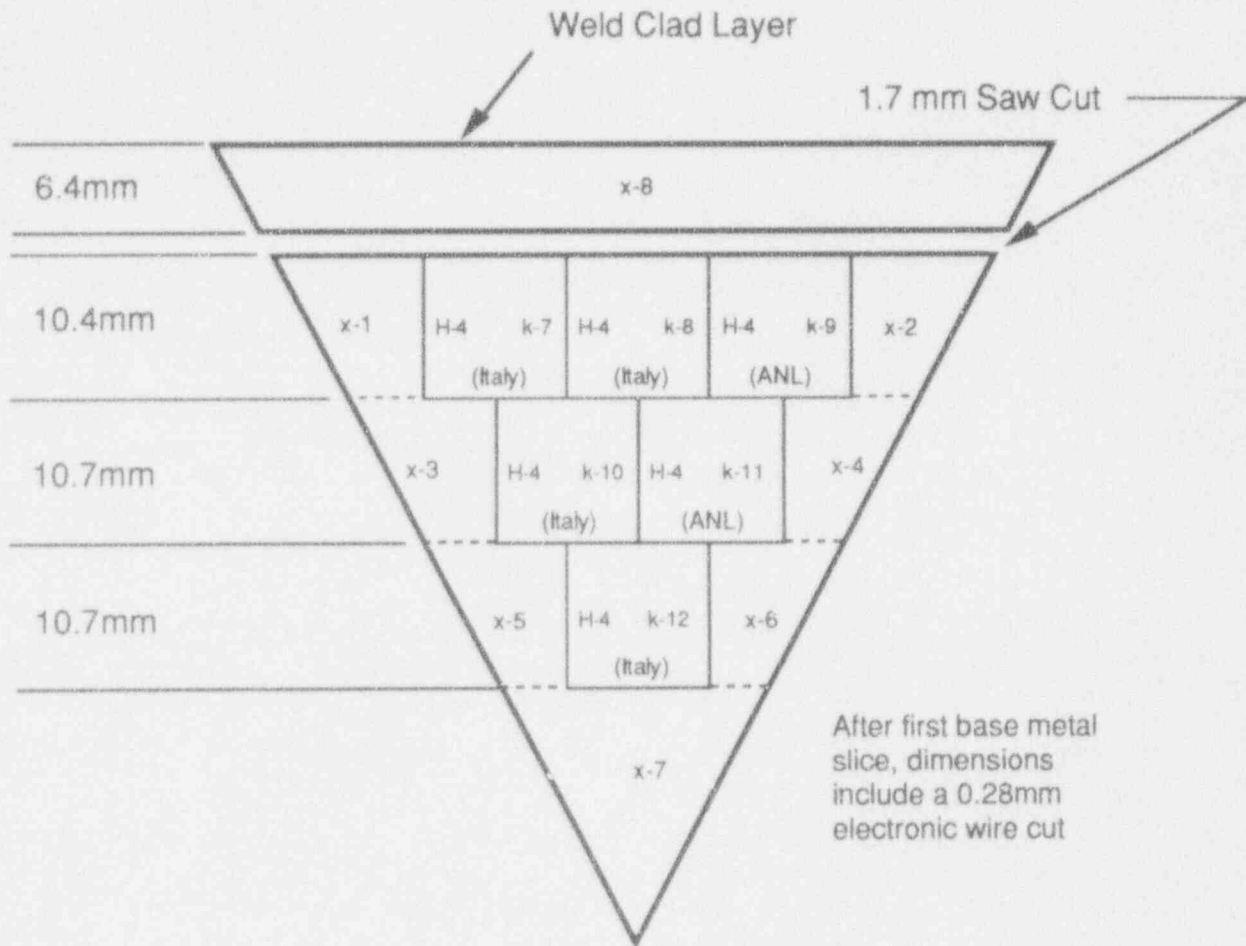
Locations of mechanical test specimens k7 through k12 cut from Sample H-4.
